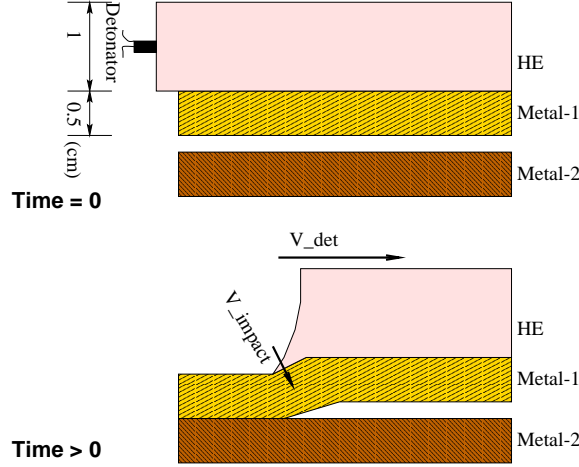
Schematic of explosive welding of two metal plates.
